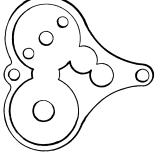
MASTER PLATE STRAPPED ON FACE PLATE OF BENCH LATHE OR QUILL
